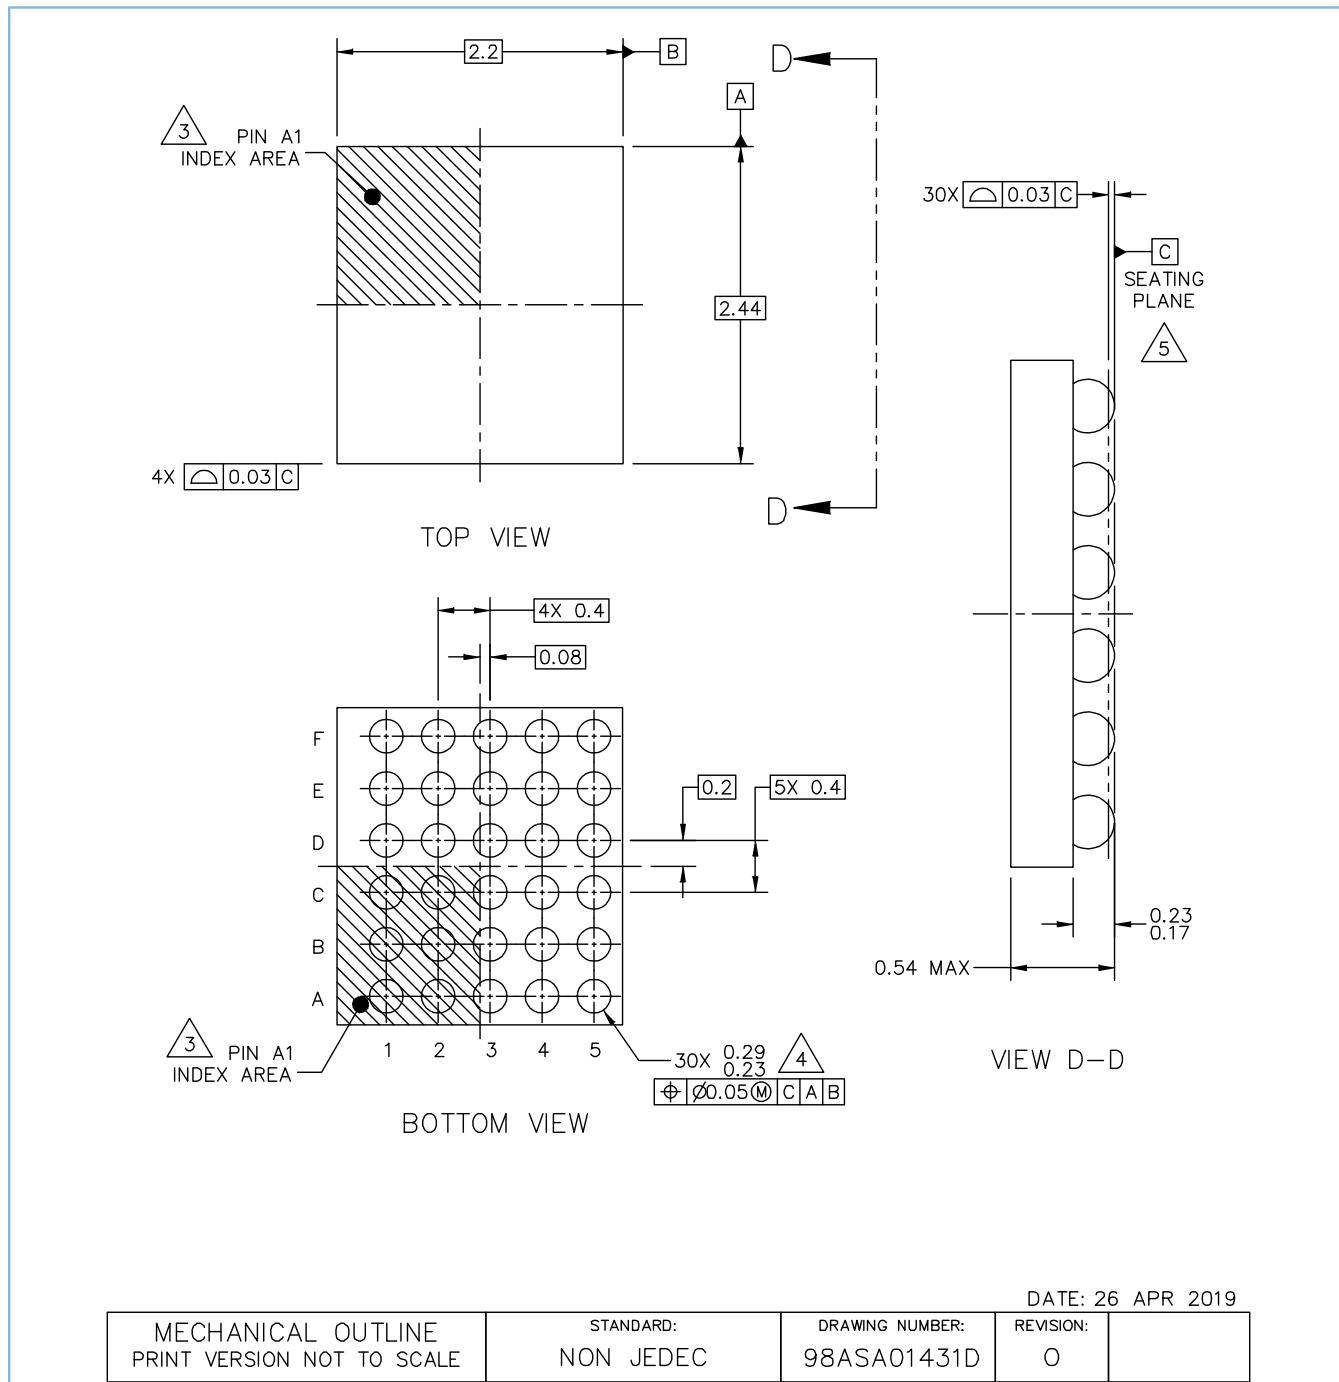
Package outline WLCSP30 (SOT1443-6); with back side coating
